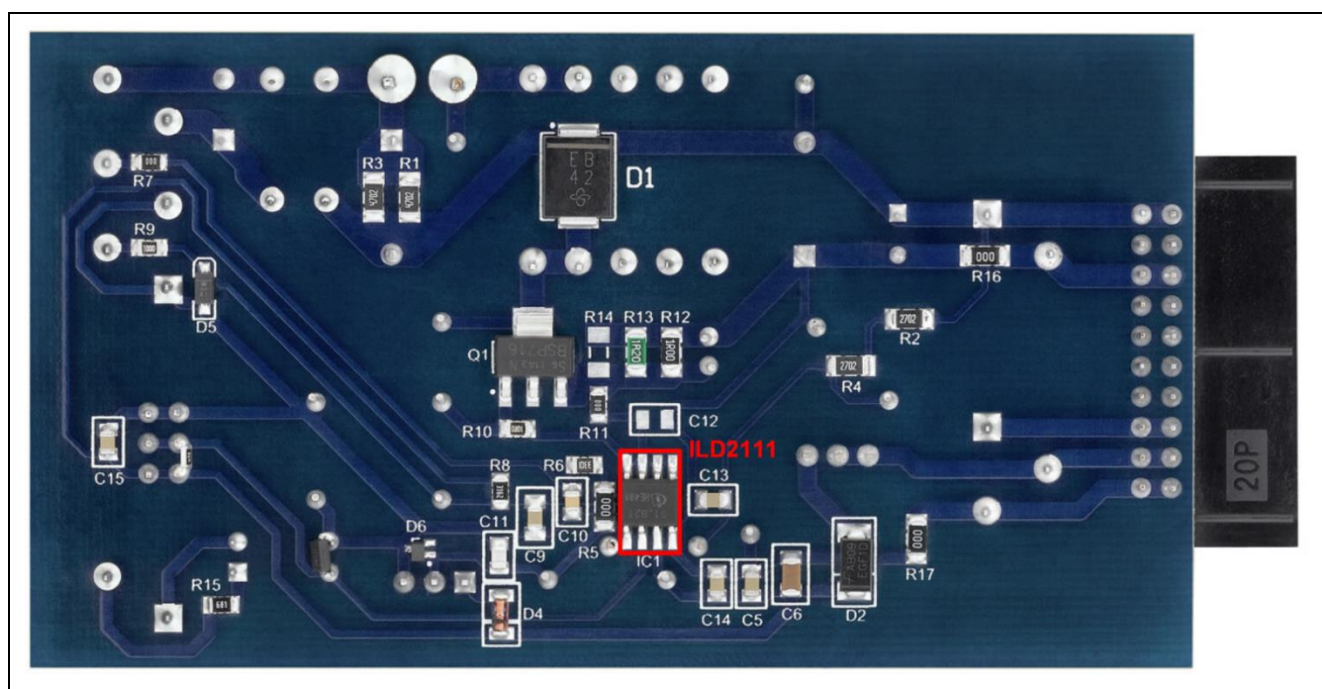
ILD2111 Evaluation Board PCB – Bottom View
